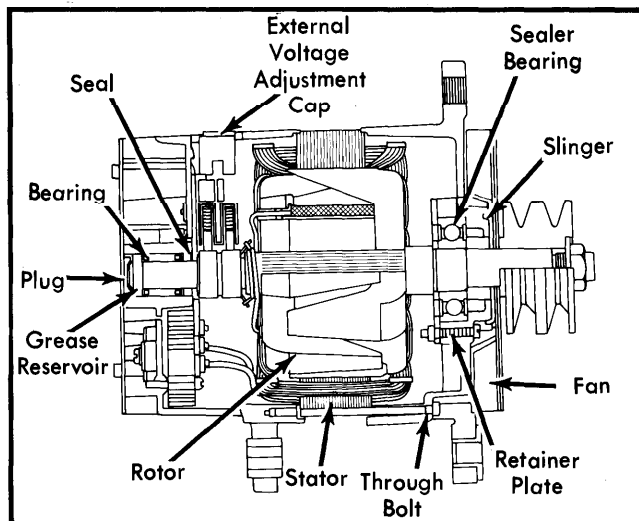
Cutaway View Showing Internal Components of Delcotron 100 Amp. Heavy-Duty Alternator With Integral Regulator
